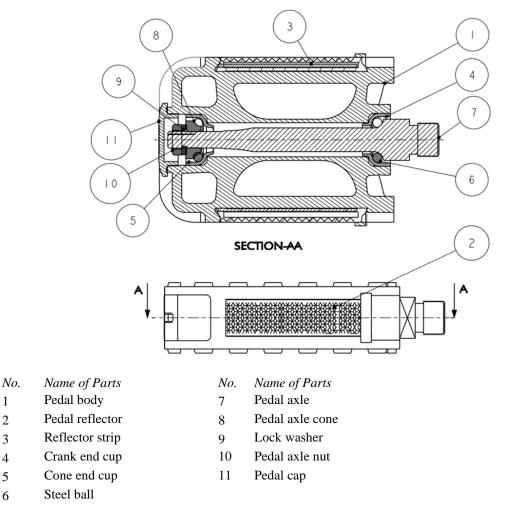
INTEGRAL TYPE PEDAL ASSEMBLY (SCHEMATIC)
